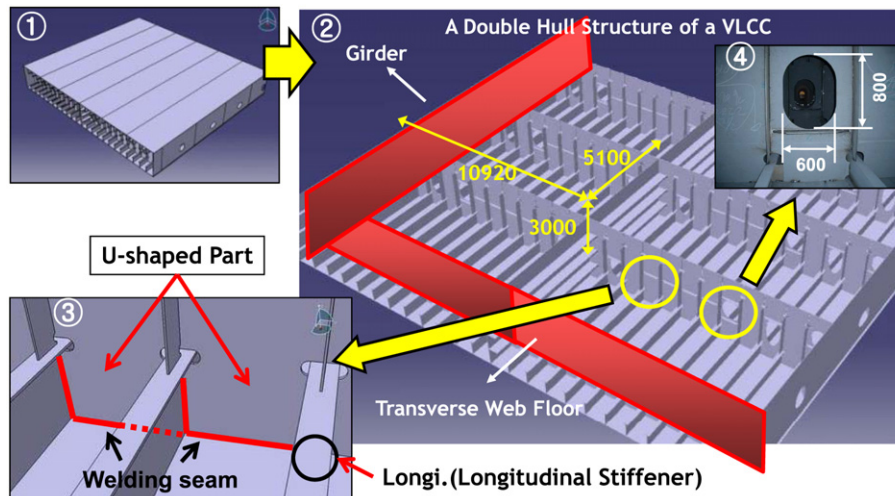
Welding target in a double hull structure and access manhole [1].
